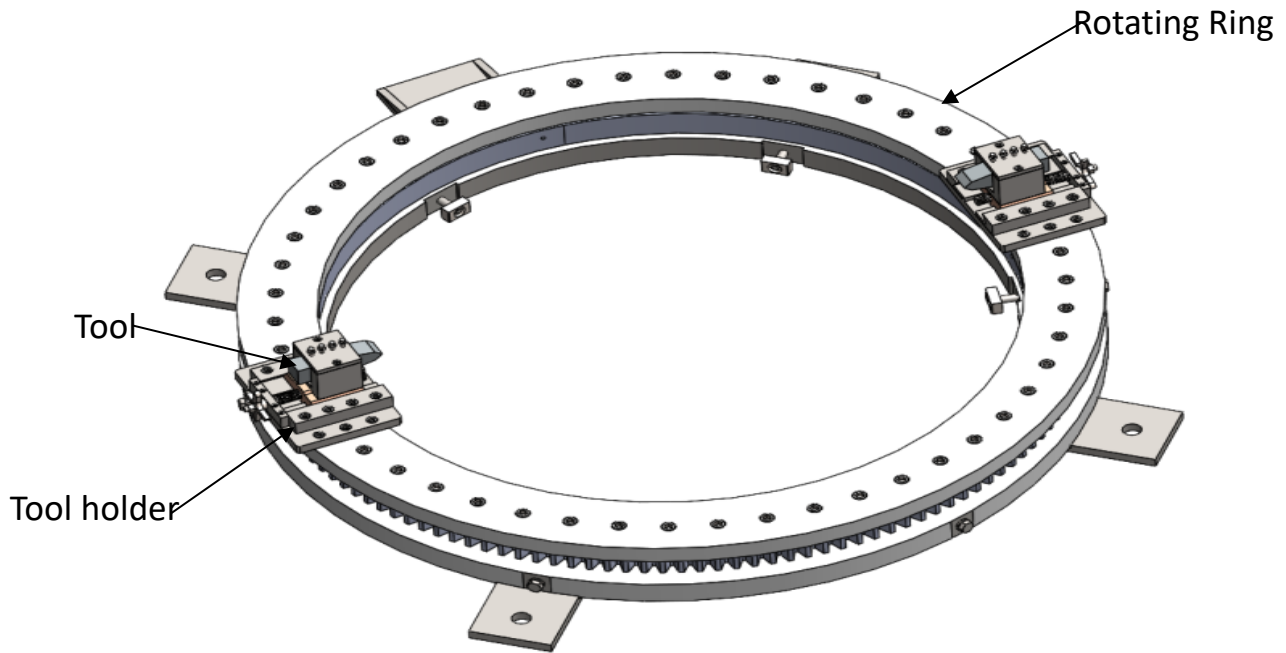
In-Situ Welding and Cutting Edge Preparation
